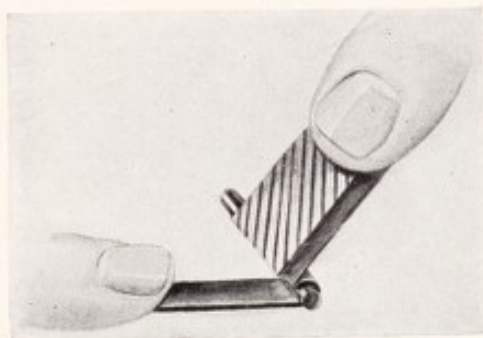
Rolling a piece of plate around a wire, holding same with a coarse file
